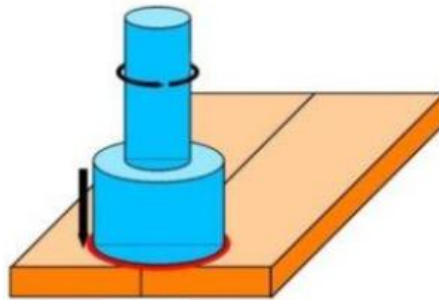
Stage 3 of the Friction Stir Welding Process – Dwell
